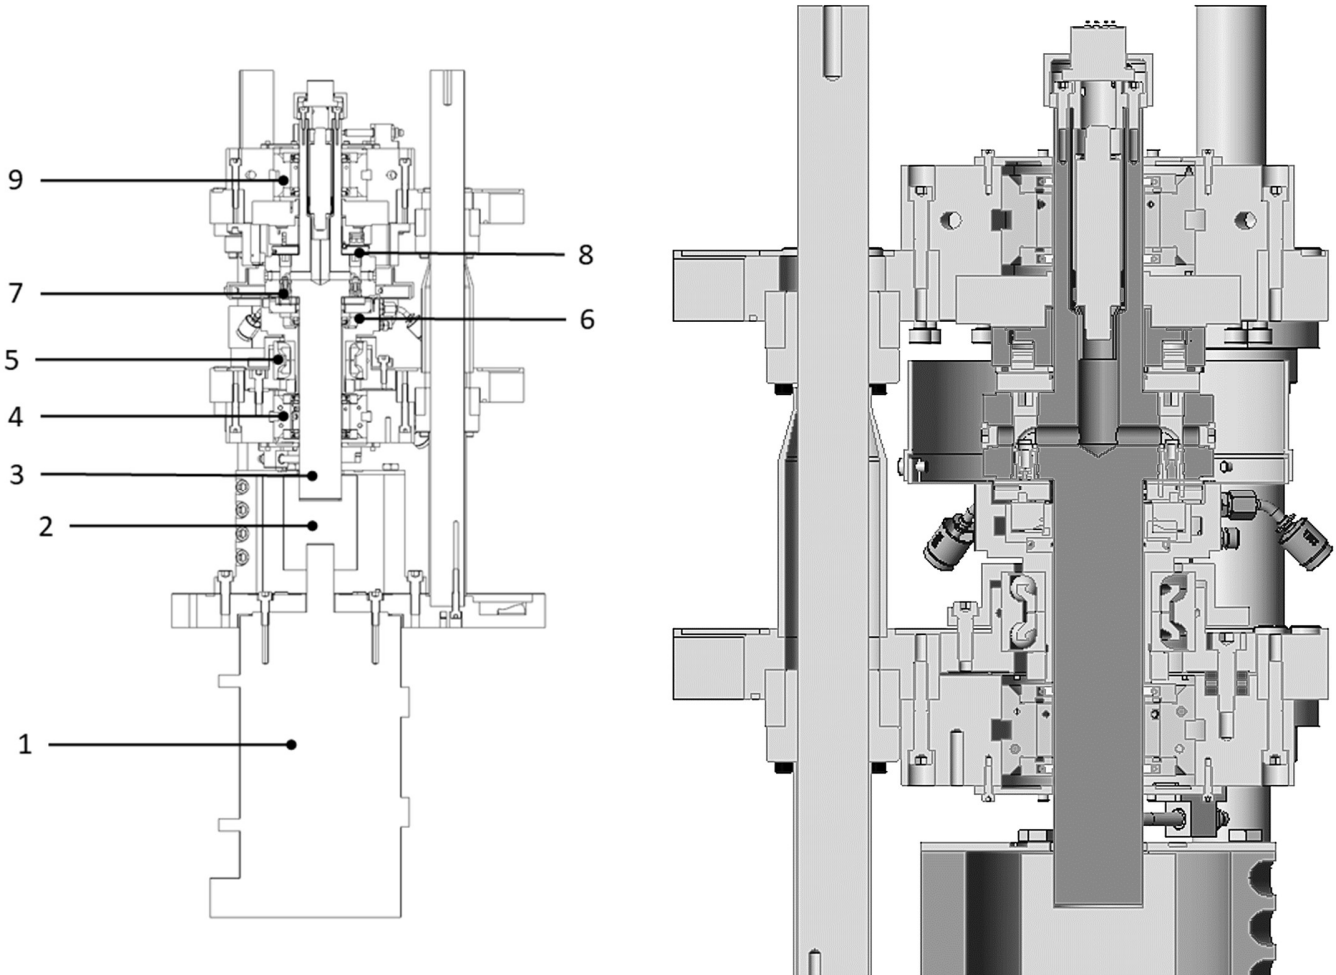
Axial bearing test-rig (left side: entire test-rig, right side: detailed test-bearing)
